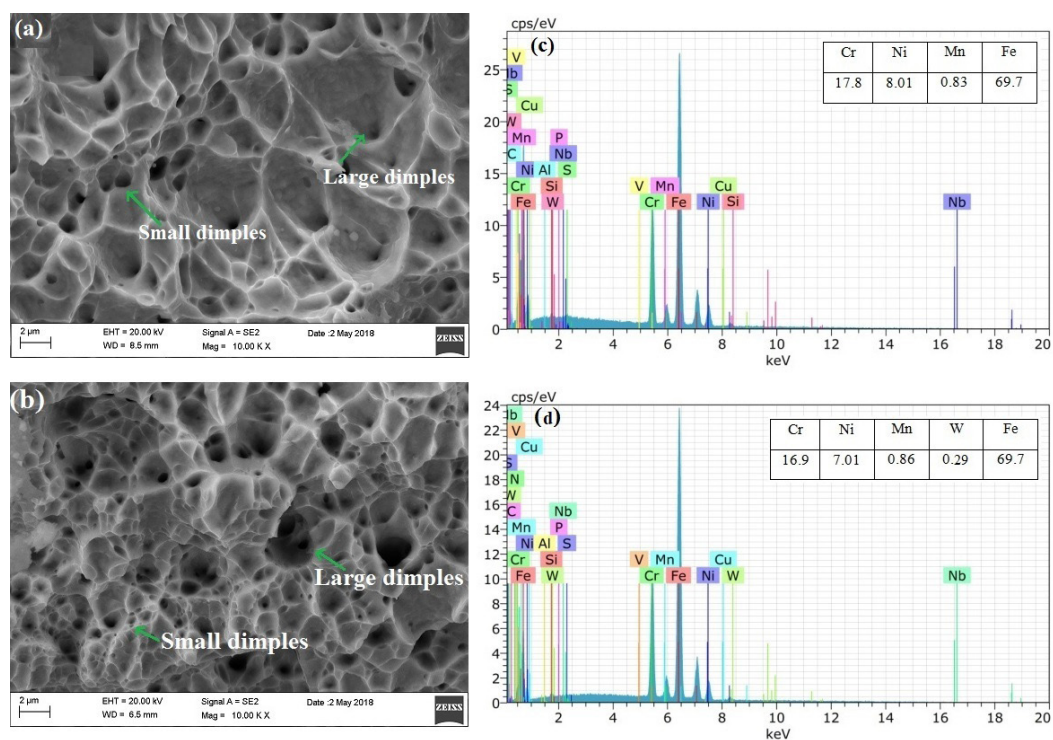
Tensile test- (a, b) Fractographs of base metal and weld metal (c, d) SEM-EDS base metal and weld metal.
